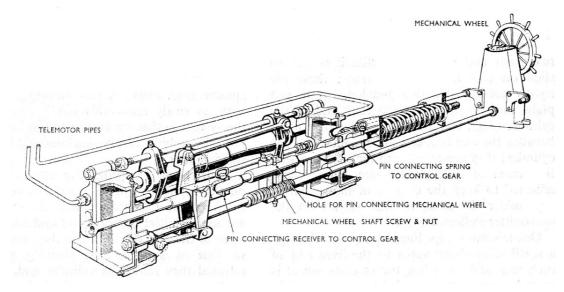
A twin-cylinder telemotor receiver (one half of the unit is shown) [88]
